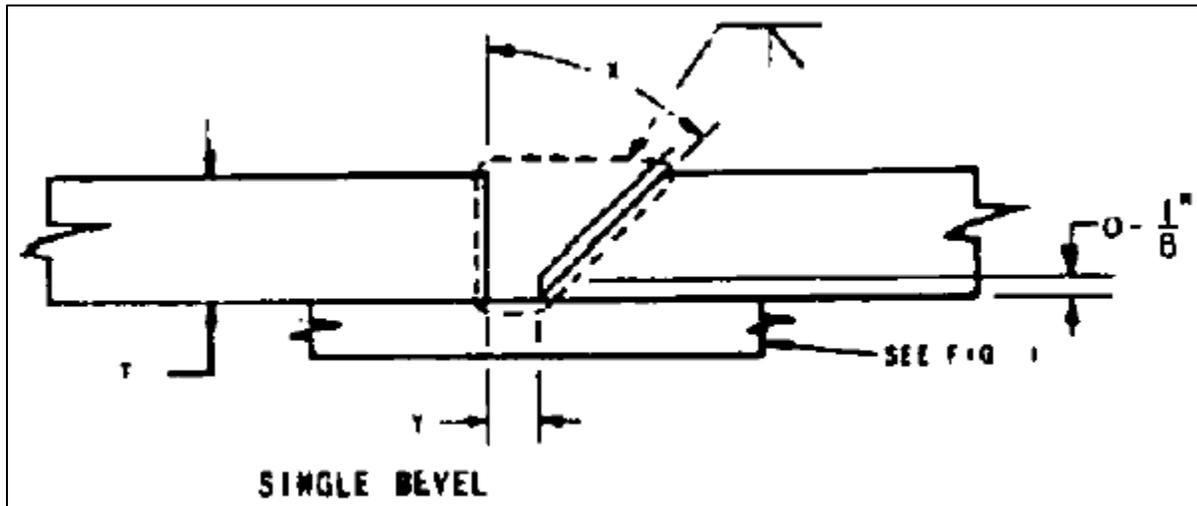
B1V.5 Weld Joint for GMAW Mechanical Test Weld Specimen
